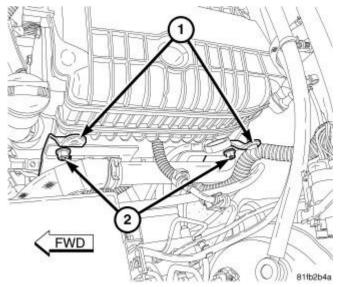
Manifold Support Brackets & Nuts Courtesy of CHRYSLER LLC
